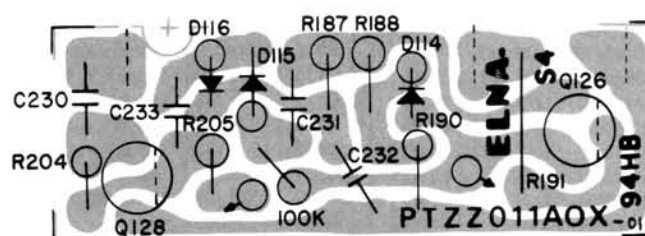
Noise Blanker Printed Circuit Board — 14T301
